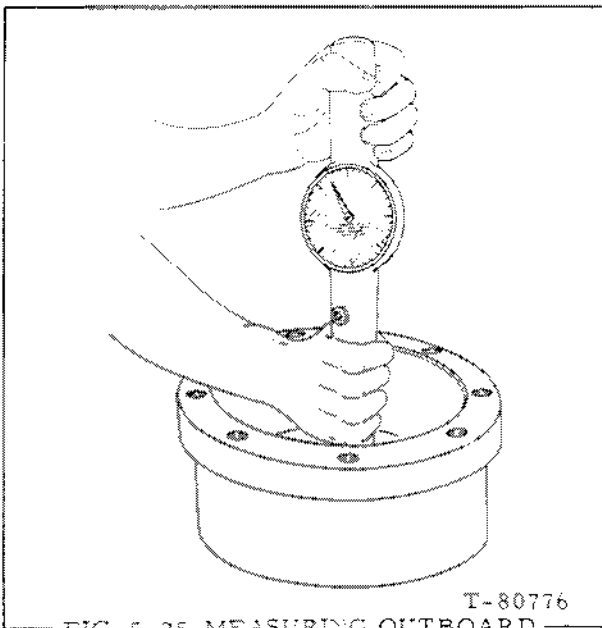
MEASURING OUTBOARD BEARING CAGE
